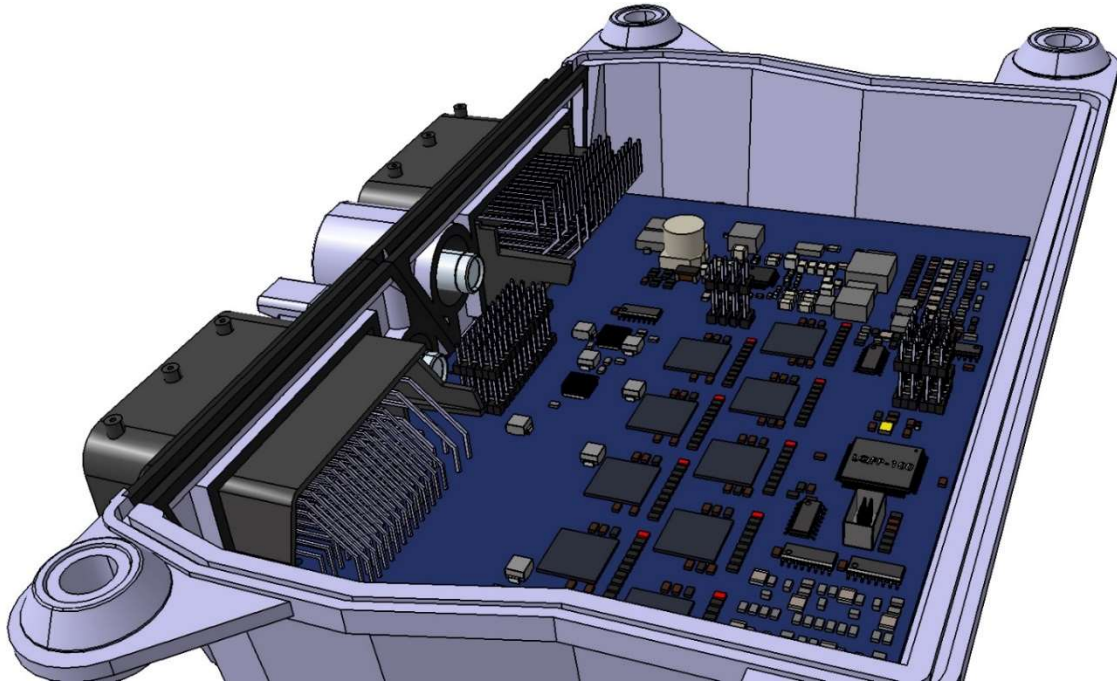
Inside of the enclosure showing the PCB with the 58-pin connector.
